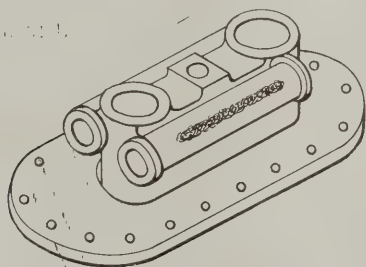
Air Compressor Steam Head Reclaimed by Gas Welding
